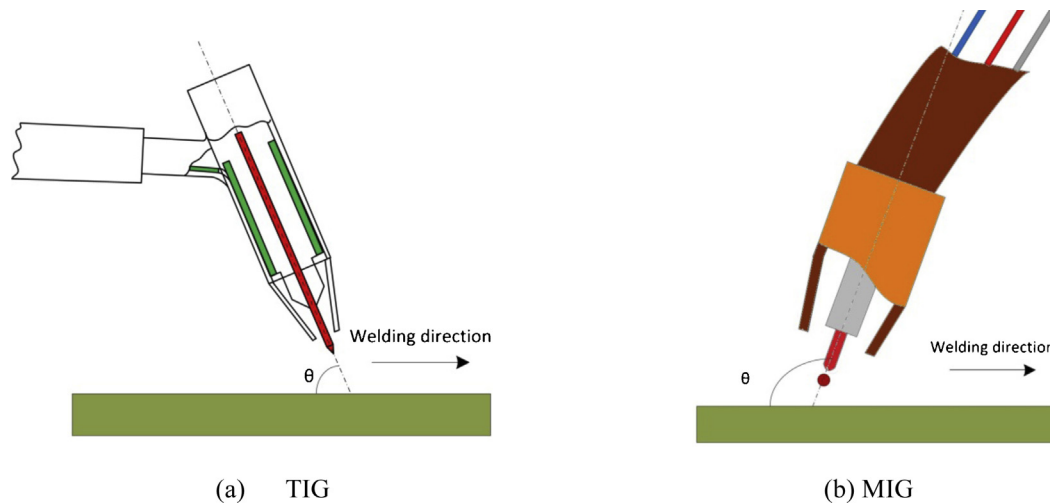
Schematic diagram of welding process with a slanted gun: (a) TIG and (b) MIG.
